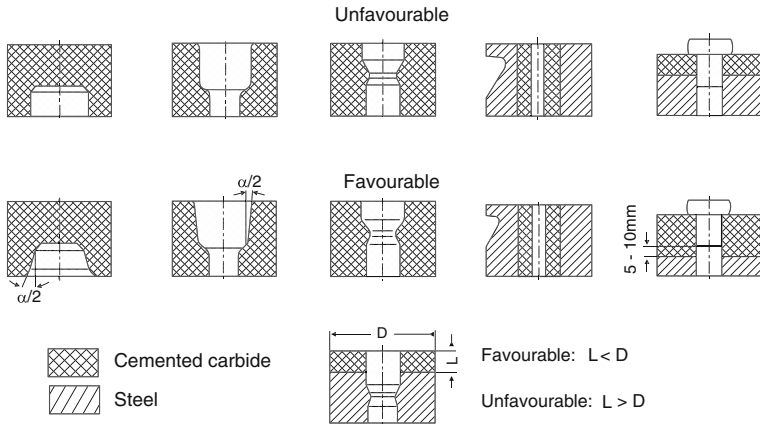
Design of carbide inserts for extrusion (acc. to Kraft)
